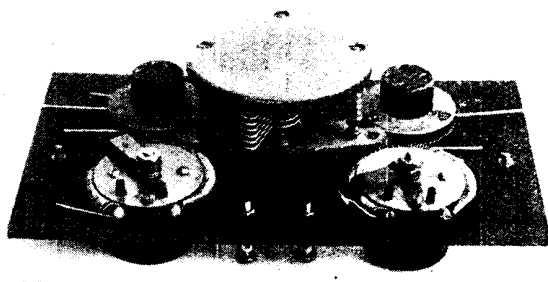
Back of panel, showing variable condenser, filament resistances and valve holders in position before the wiring is begun
